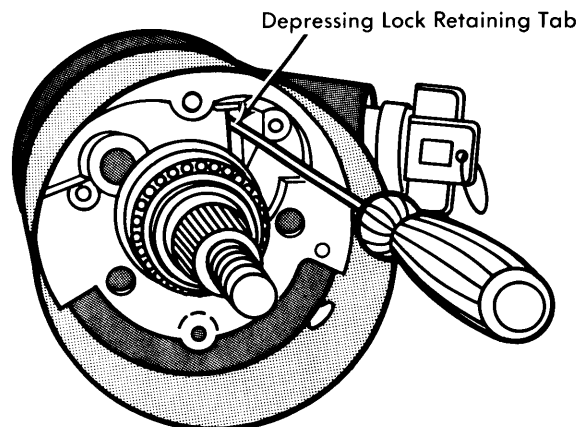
Depressing Lock Cylinder Retaining Tab On American Motors and General Motors Vehicles
